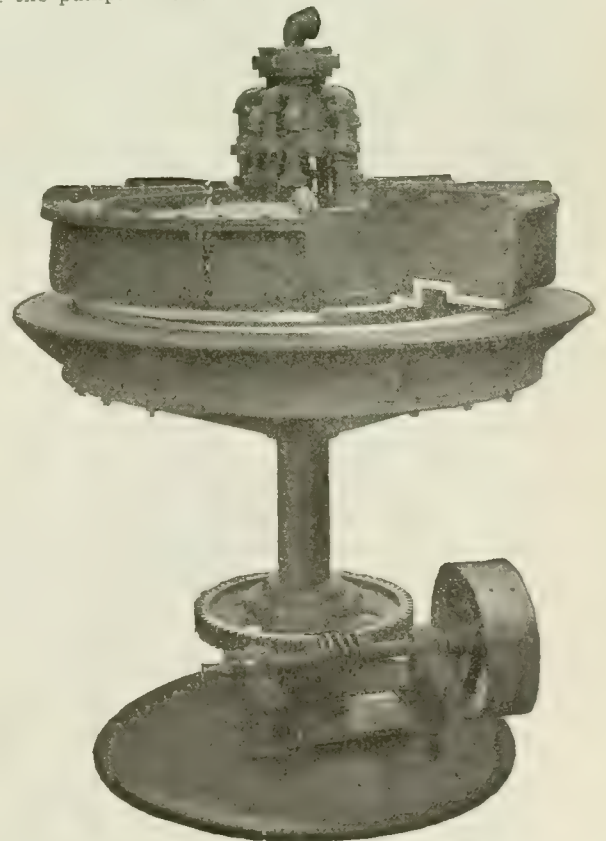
A LAYOUT AND LOCATING FIXTURE USED IN CONJUNCTION WITH JOHANSSON SIZE BLOCKS.
